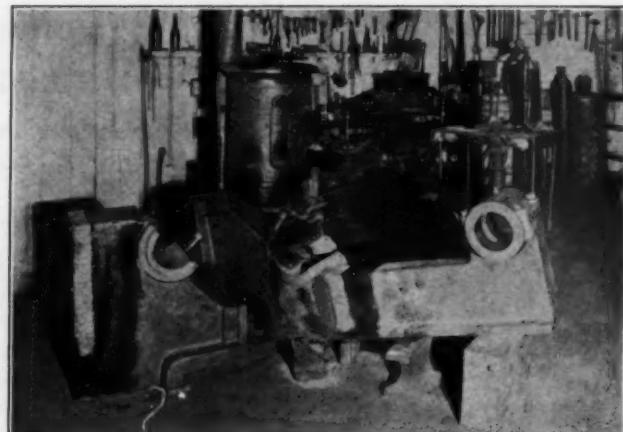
These broken castings were completely welded on the same day of the break, and returned to the drawbench stronger than ever, and ready for reinstallation.
